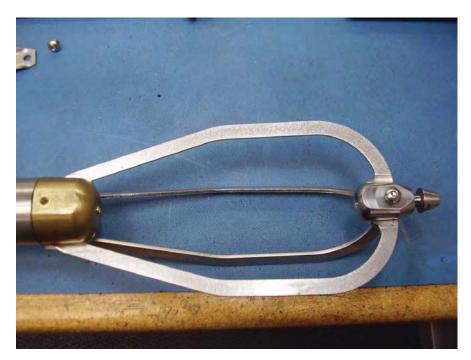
Cage tip mounted with two of the impeller cage pieces
